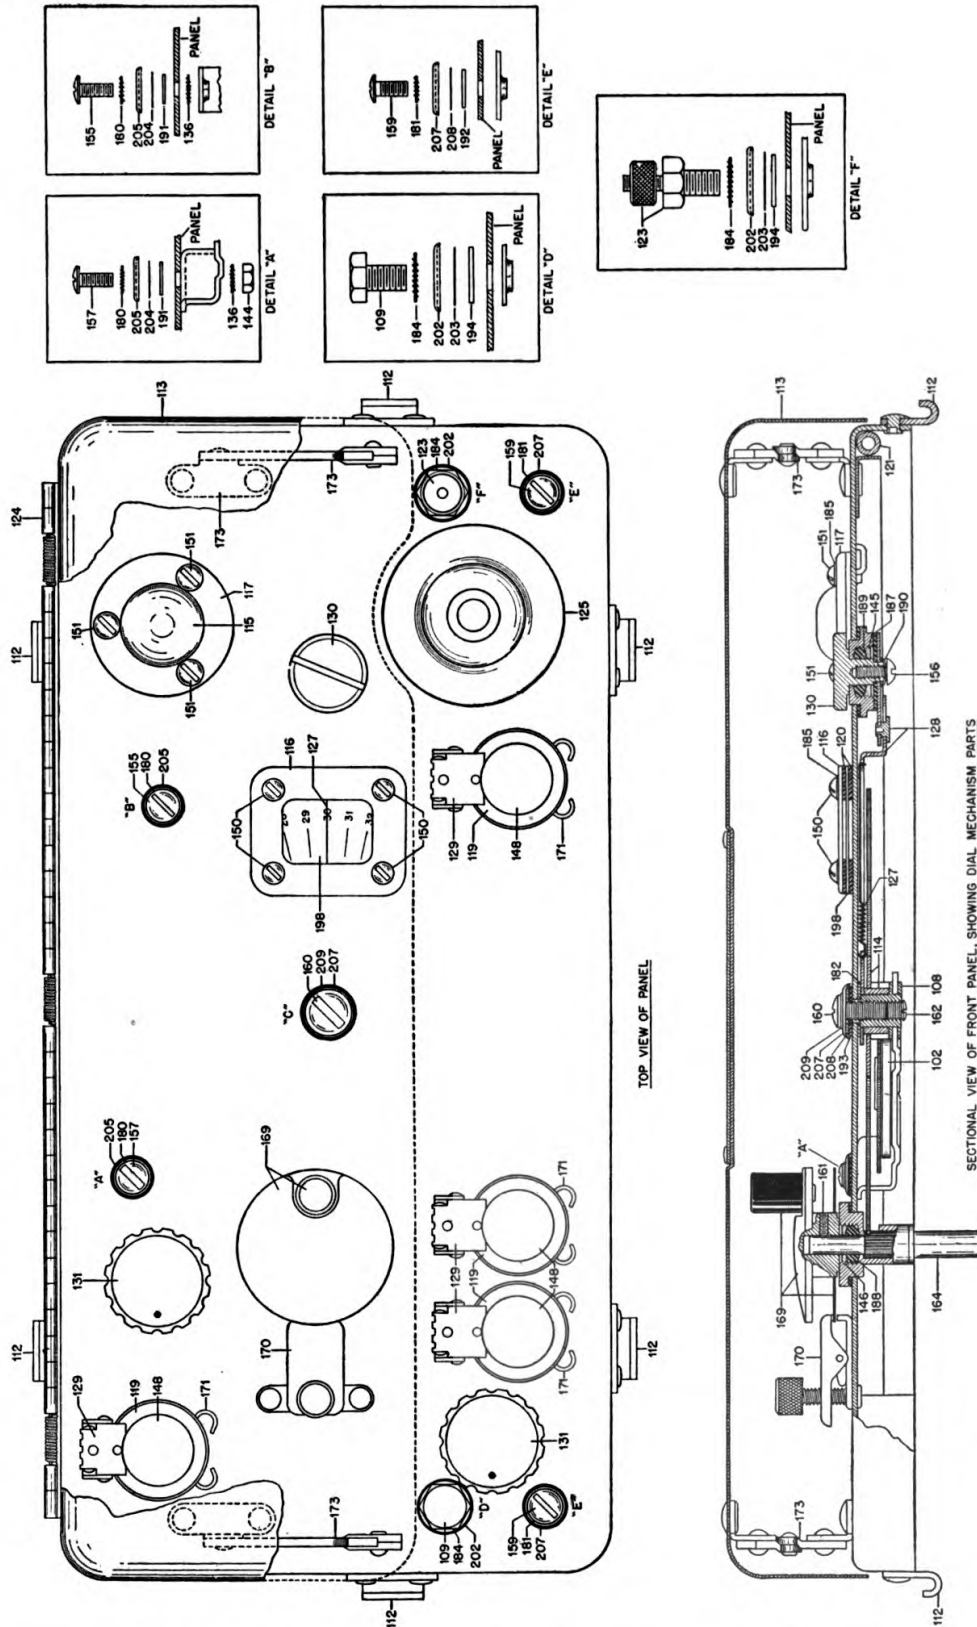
Radio Receiver and Transmitter BC-1000-A, Parts Location Diagram Showing Dial Mechanism Parts.
